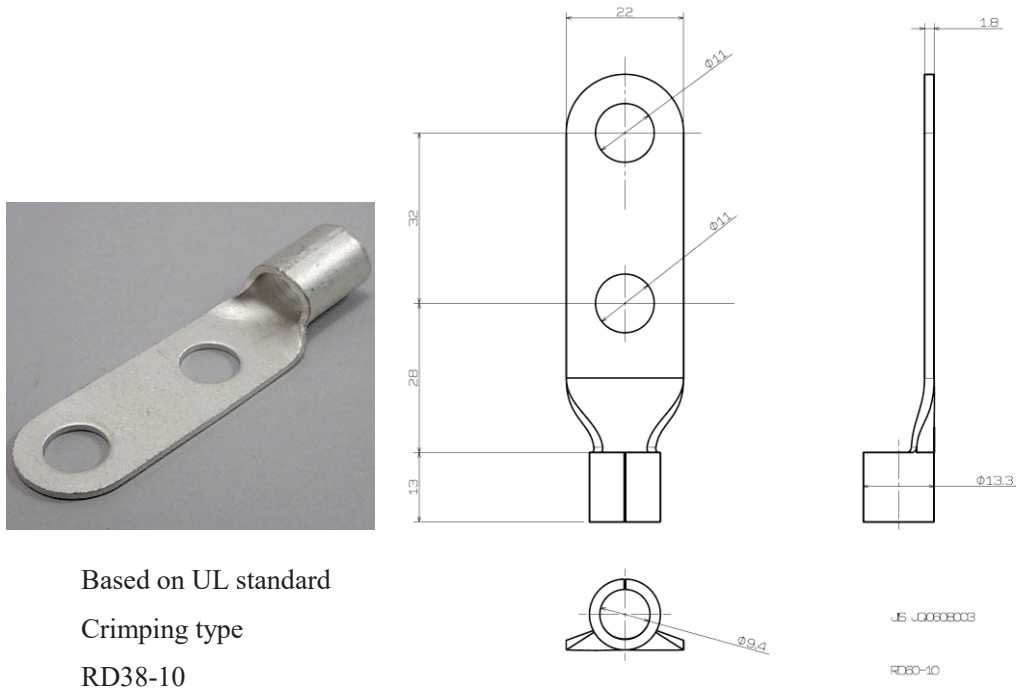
Crimping type solderless terminal RD38-10 for wire 38SQ.
